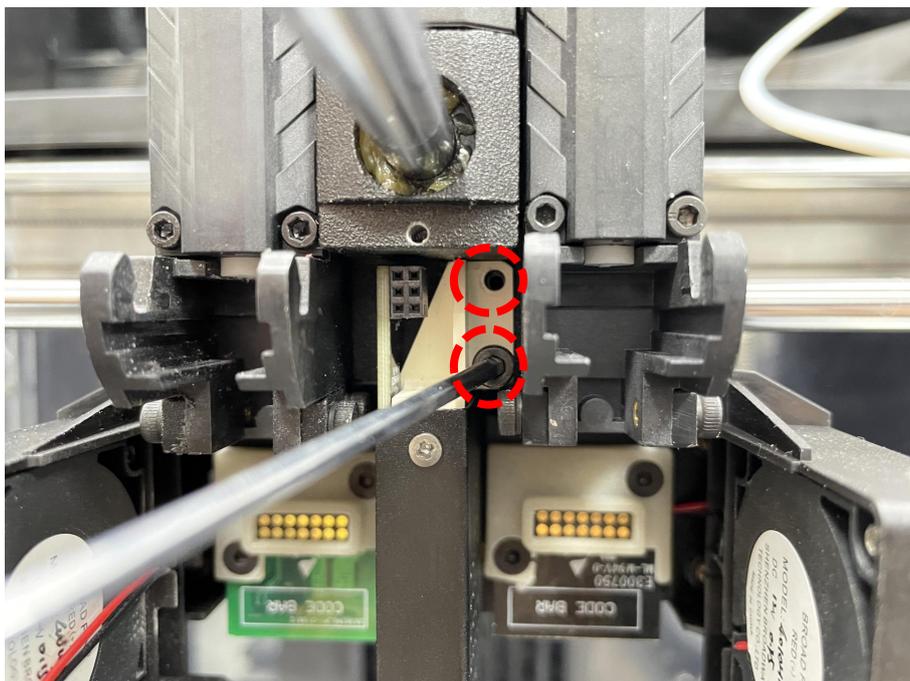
Remove 2 securing screws on the auto-leveling assembly.
